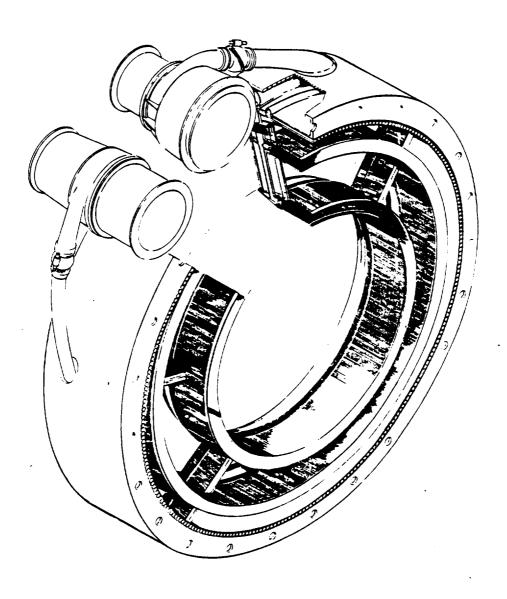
Perspective of the Class 2 LAIR/LH2 Rocket Primary Assembly
